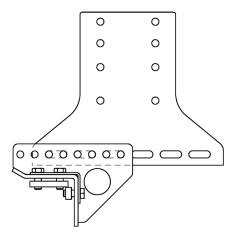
Fit the upper part of the bracket onto the lower part. Installation must cover at least 6 of the holes on the row on the lower bracket.
